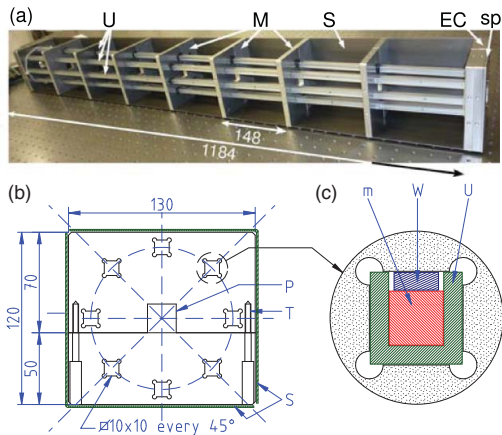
(Color online) (a) Picture of the Zeeman slower: [M] mounts, [EC] output end cap screwed in last mount, [U] U-shaped profiles, [S] half part of the shield, [sp] 5 mm spacer between end cap and shield side. (b) Individual mount; [T] threading to screw the two parts of the mount together, [P] central square milling in which CF16 pipe goes through. (c) Detail of a square hole to show U-shaped profiles insertion, magnets [m], and plastic wedge [W]. Dimensions in mm.
